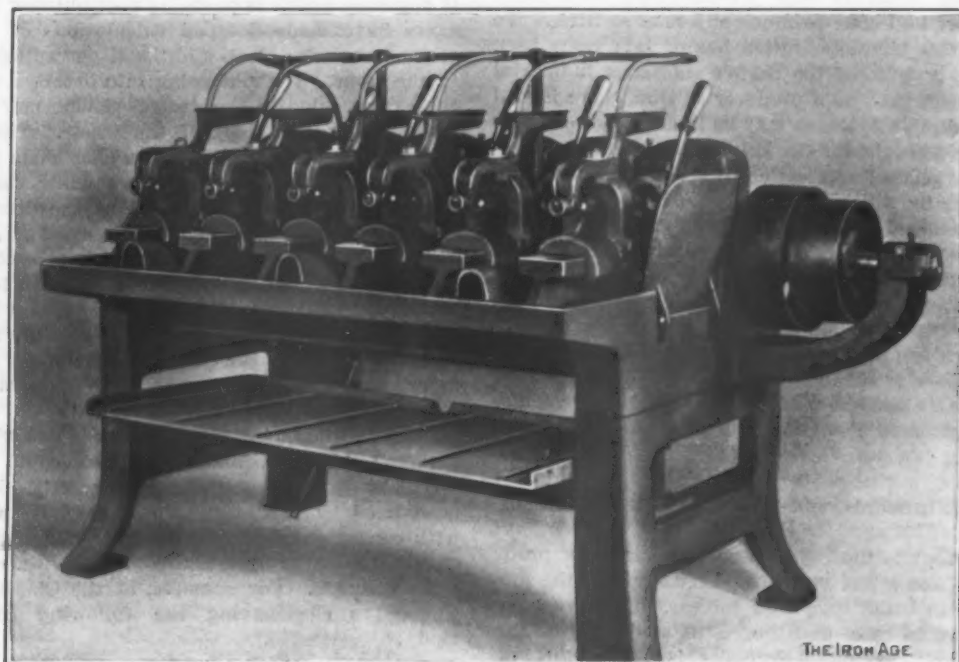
The Coulter Horizontal Nut Tapper, Built by the Automatic Machine Company, Bridgeport, Conn.
